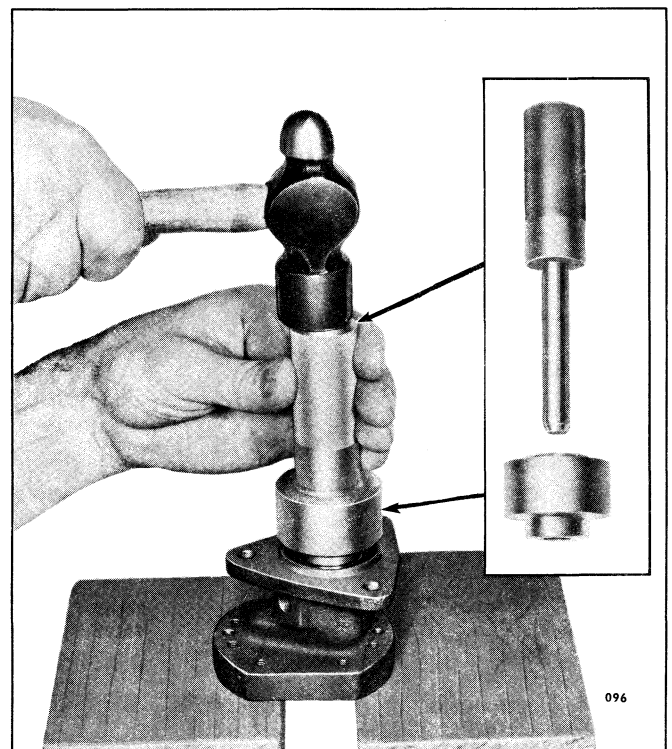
Installing Outer Oil Seal in Fuel Oil Pump Body with Tools J 1508-8 and J 1508-9
